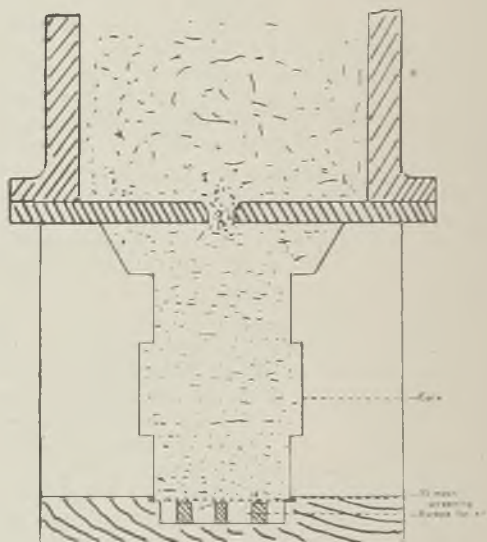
ARRANGEMENT OF VENTED BOARD ACTING AS FLOOR AND CAPABLE OF VENTING MANY DIFFERENT TYPES OF CORE.
